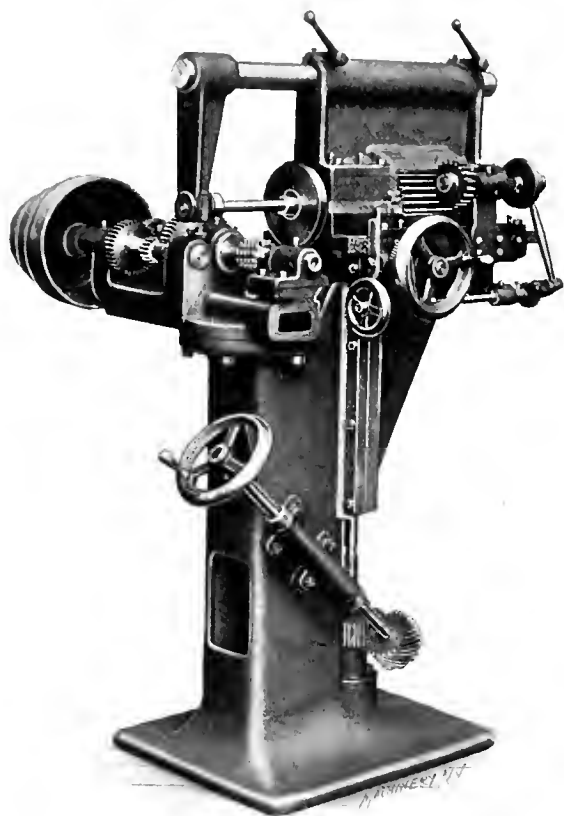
Gear-hobbing Machine for Hobs of Fixed Helix Angle.
